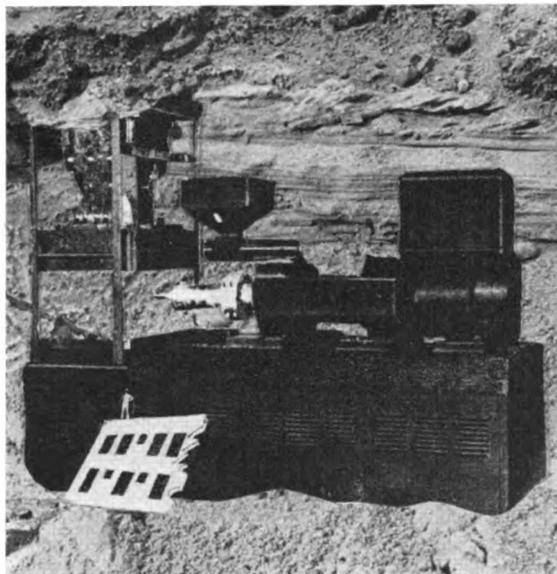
Excavated ruins (year 7000). Injection molding machine.
